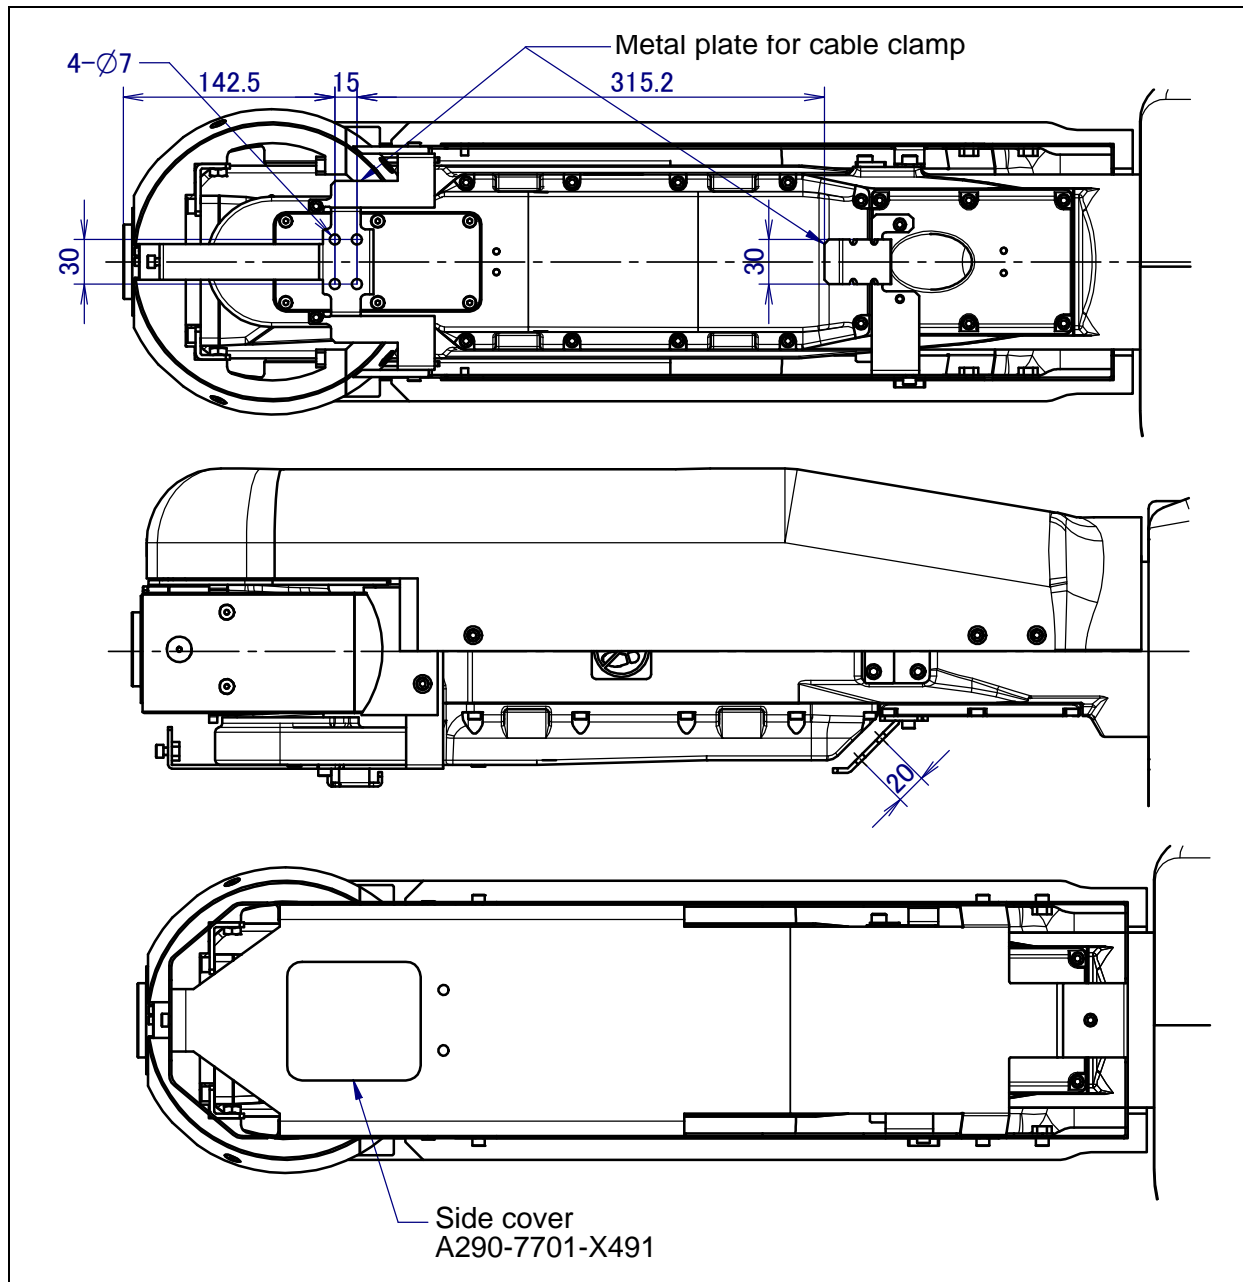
(c) Equipment mounting faces (for the cable clamp)
